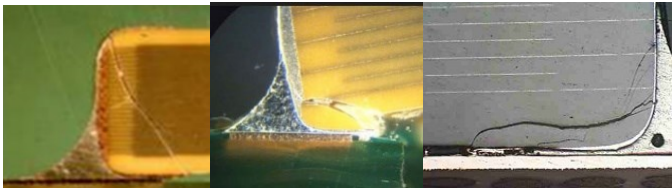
Close up of surface mount multi-layer ceramic capacitor damaged during vibration stress or printed circuit board flex [107], [126], [127].
